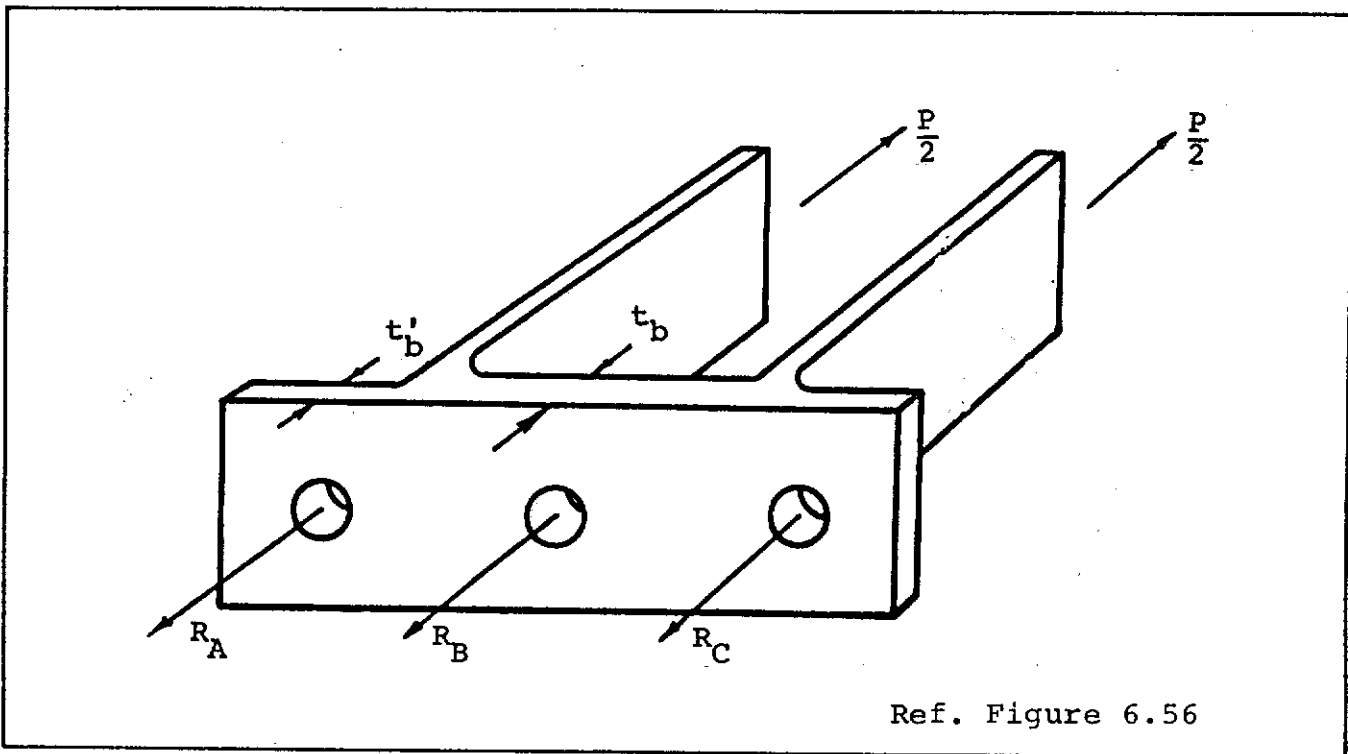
CHANNEL FITTING - END PAD BENDING ANALYSIS
